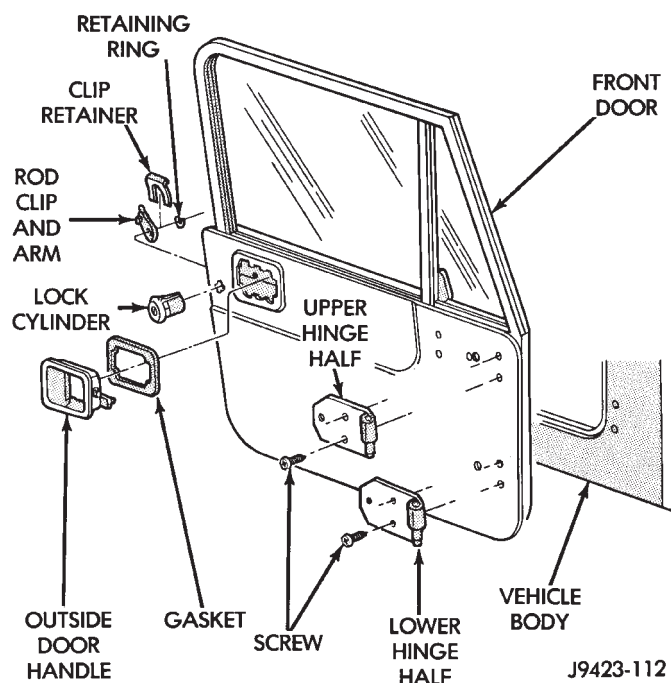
Key Lock Cylinder and Door Handle Removal/Installation
